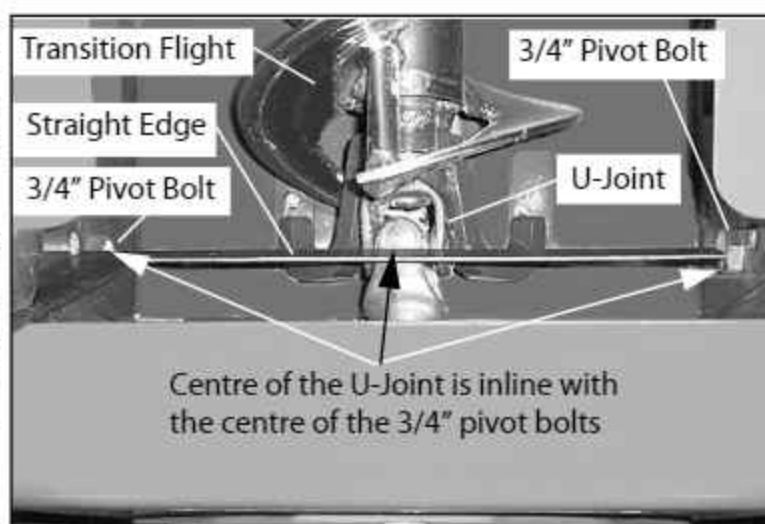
Aligning the U-Joint and Pivot Bolts
